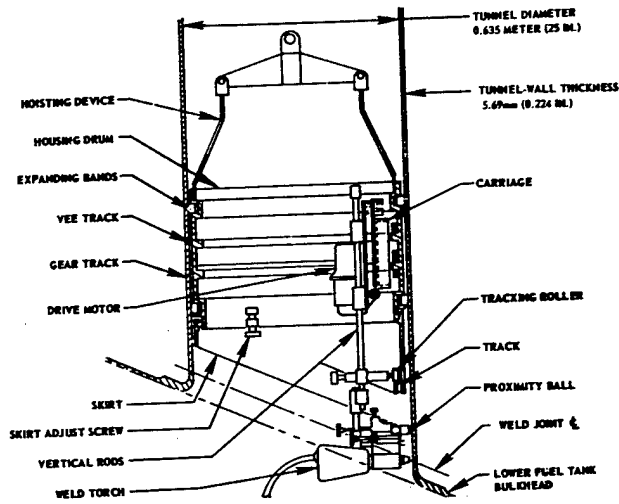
LOX-TUNNEL WELDING MACHINE
